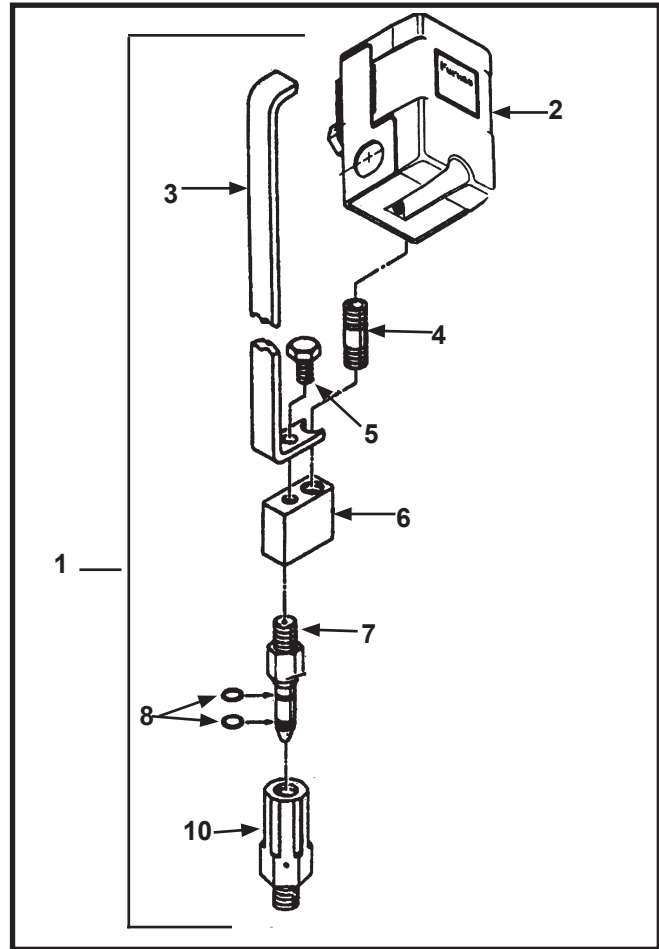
EXPLODED VIEW OF 0AWSPLF CONTROL KIT
